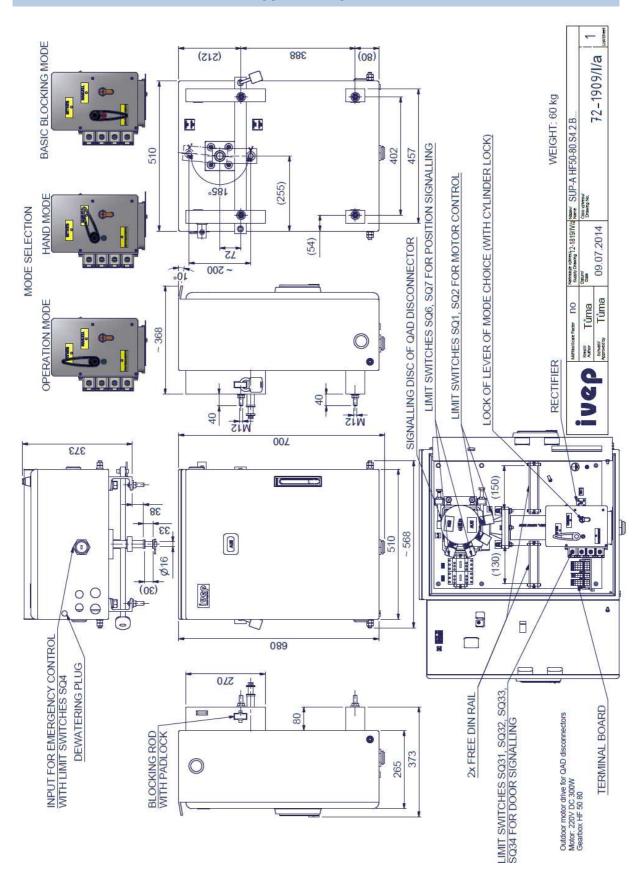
SWITCH DISCONNECTOR WITH THE SUP ELECTRIC MOTOR DRIVE MECHANISM ASSEMBLED STATE
